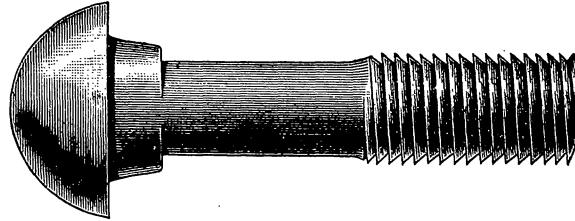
Soft Steel Track Bolt with Raised Thread.
